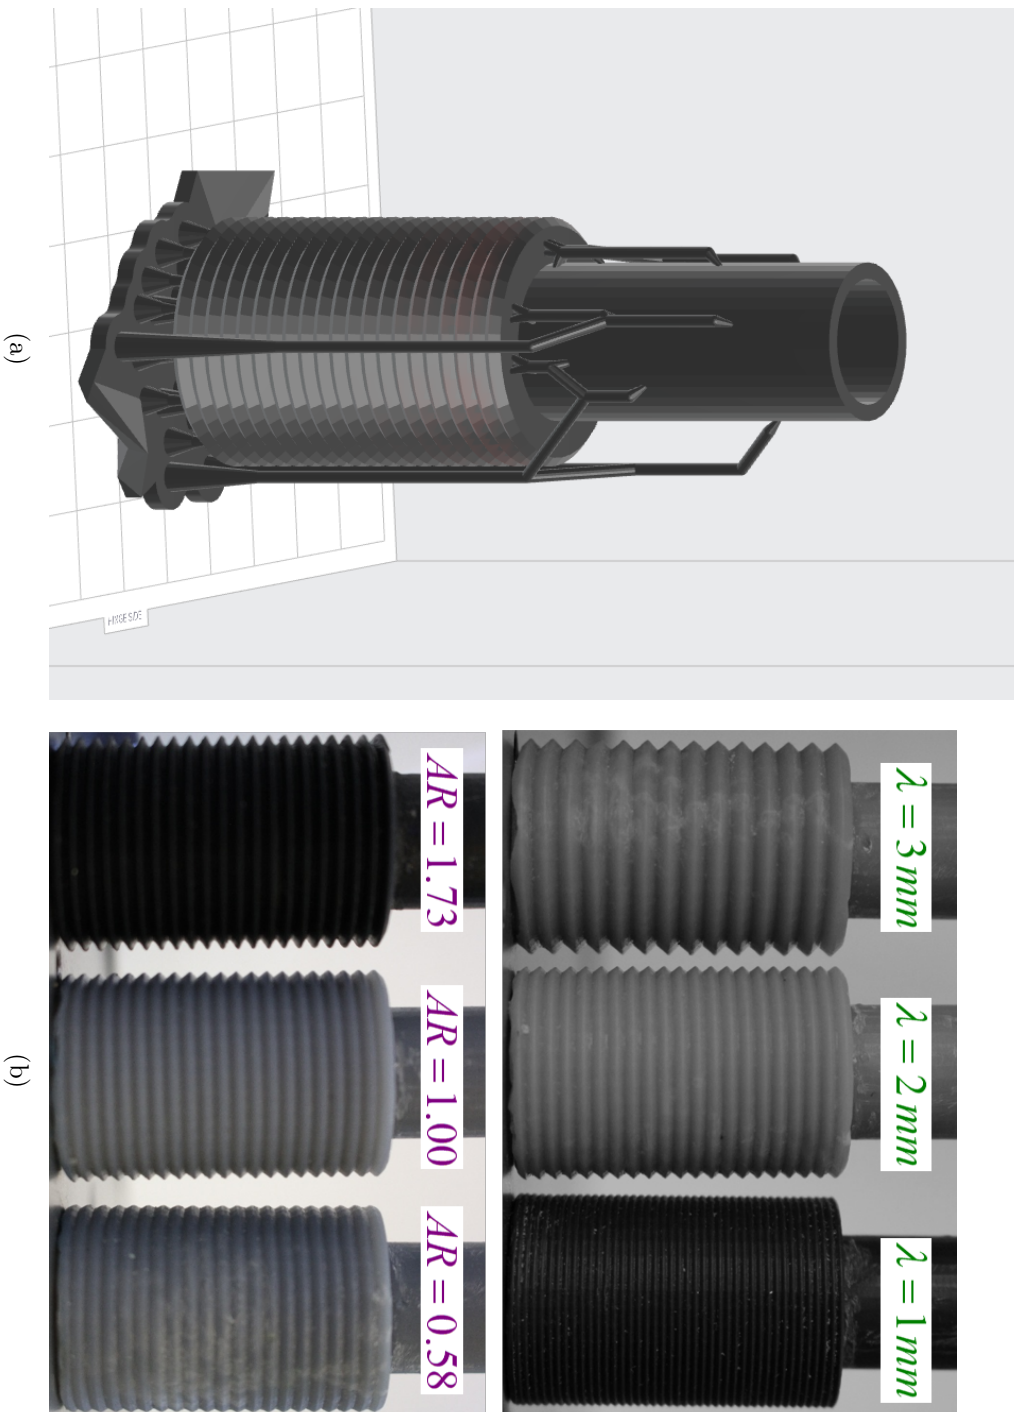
(a) A screen shot of the 3D model of the riblet covered rotors with the needed supports prior to printing using a Form 1 + 3D printer. The supports were created using Formlabs software preForm. (b) 3D printed riblet covered rotors with different wavelengths $\lambda = 1 \text{ mm}$, 2 mm , and 3 mm and aspect ratios $AR = 0.58$, 1 , and 1.73 .
